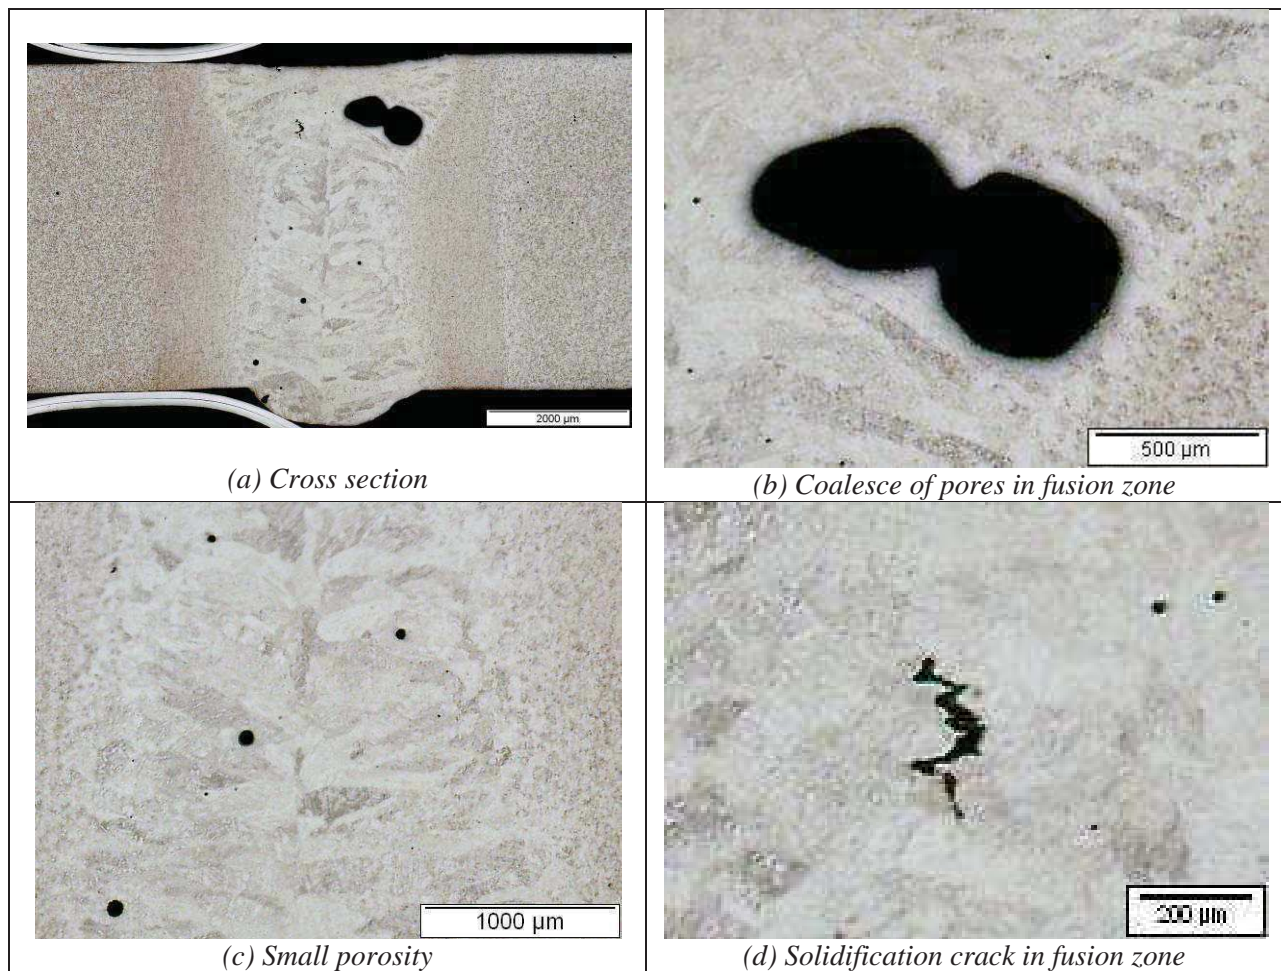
Welding defects obtained at Sample 3A (3 kW and 12.5 mm/s)
